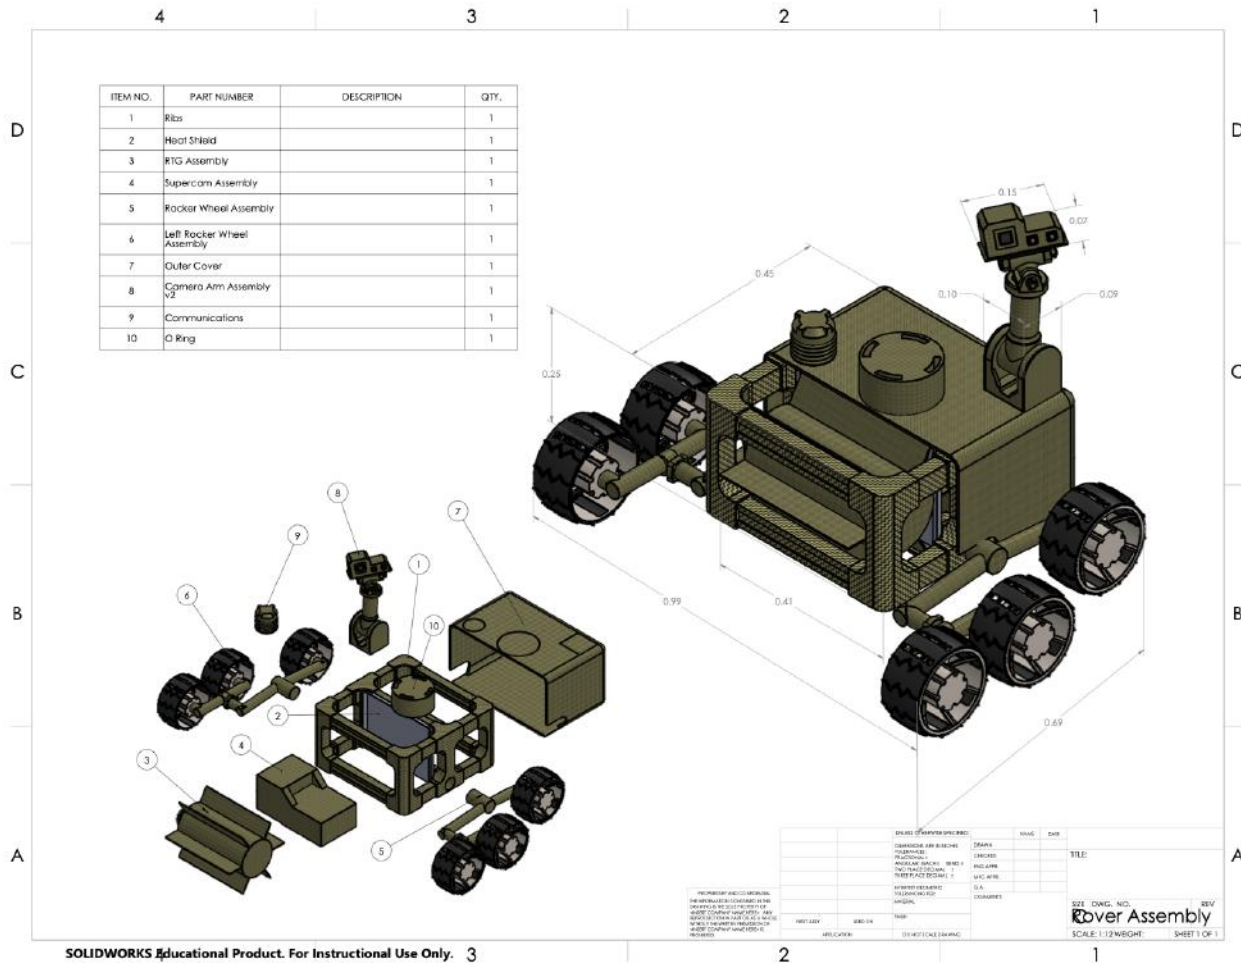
Solidworks CAD 3D model of ARES-42 entire Rover body assembly.
